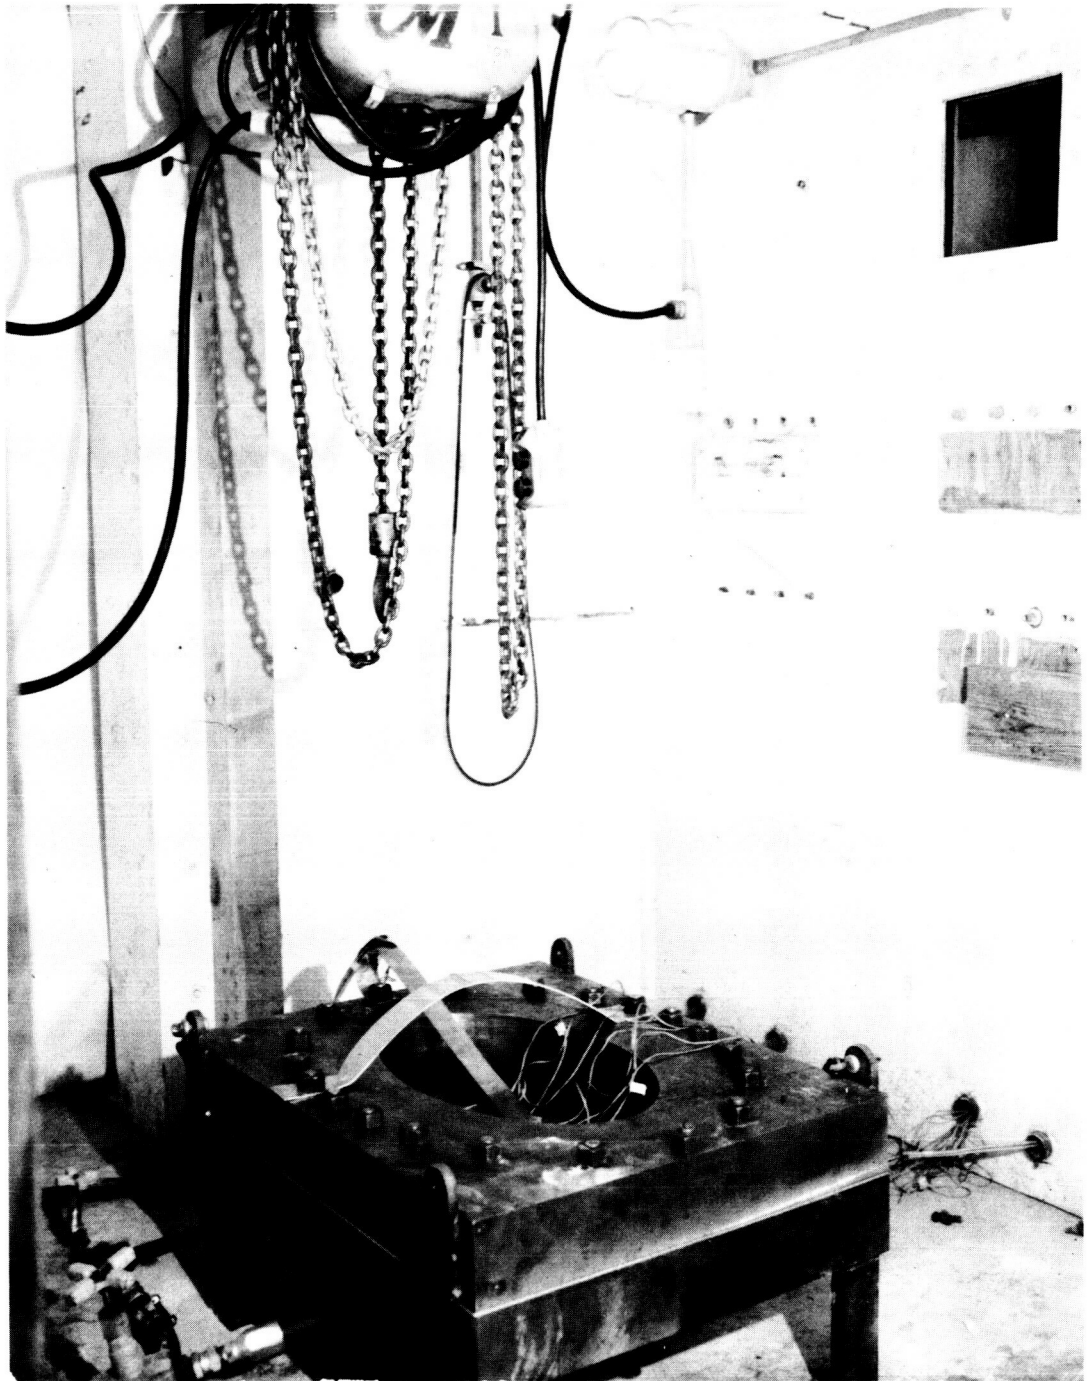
ELLIPTICAL BULGE FIXTURE INSTALLED
